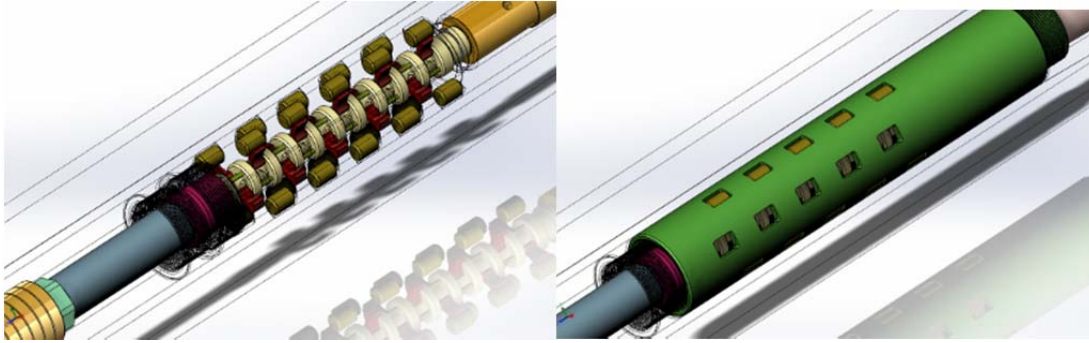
Revised source hammer design. The left-hand figure is the internal hammer assembly. The right-hand drawing is a schematic of the outer sub-assembly showing anvil positions.
